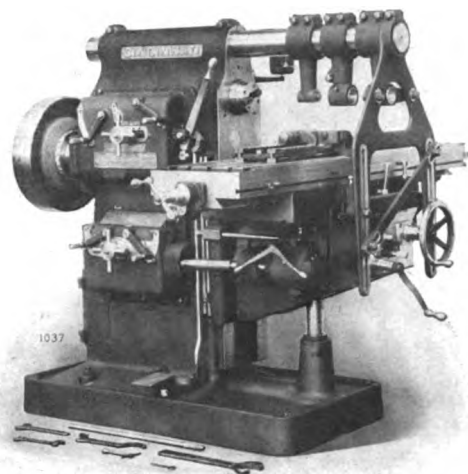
Nos. 2 and 3 Plain High Power Millers
